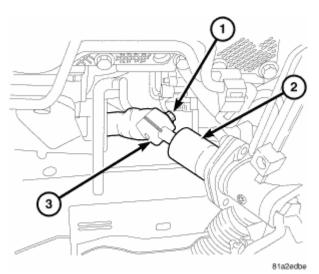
Identifying Steering Gear & Gear Mounting Bolts Courtesy of CHRYSLER LLC
